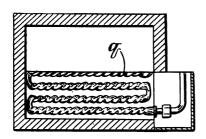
Serpollet system. Horizontal section of boiler or steam generator.
